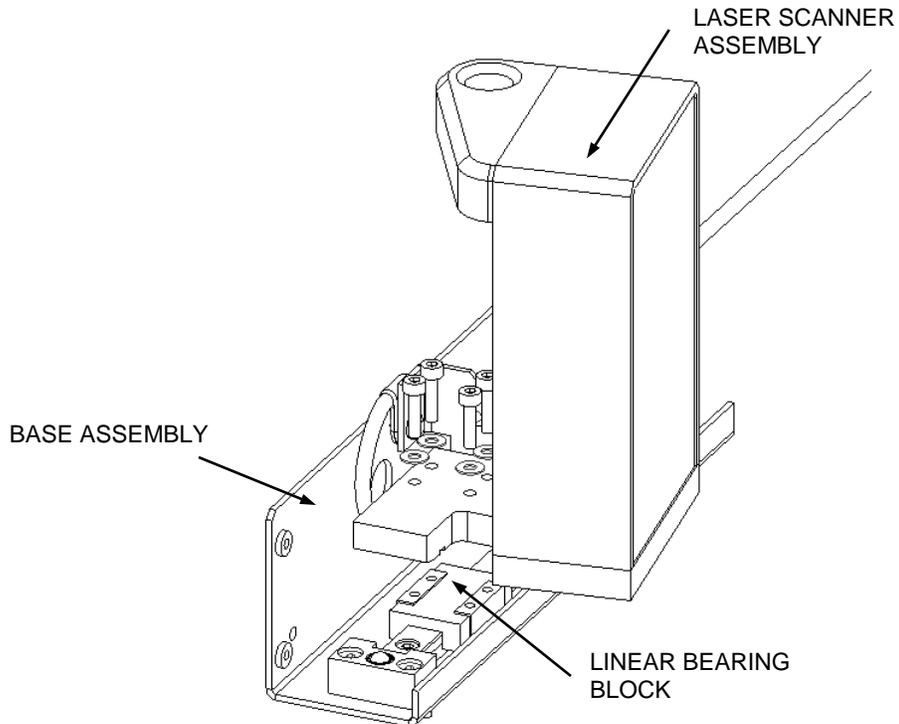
Removing the Laser Scanning Assembly from the Base Assembly
